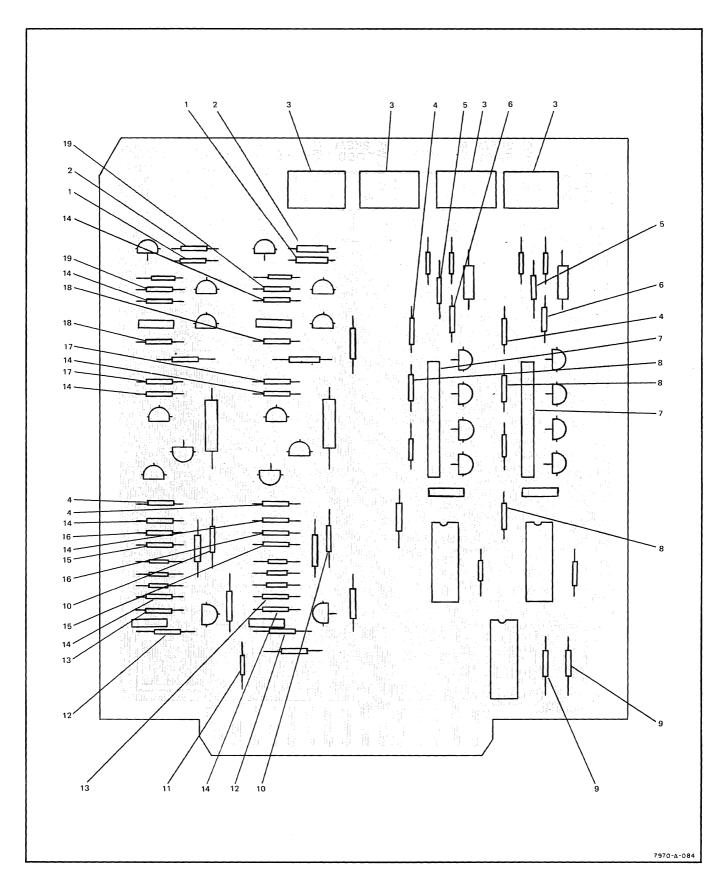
Dual-Channel Read Data PC Assembly (21 - 45 IPS) (Sheet 1 of 2)
